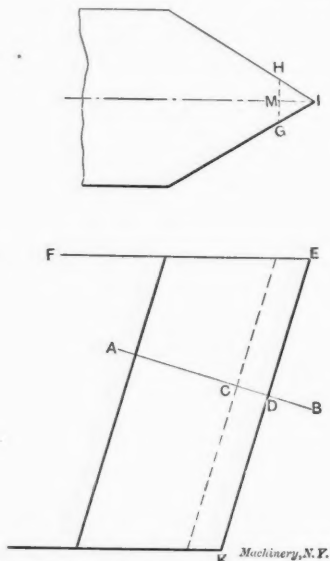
U. S. Standard Thread Tool before Grinding Flat.
